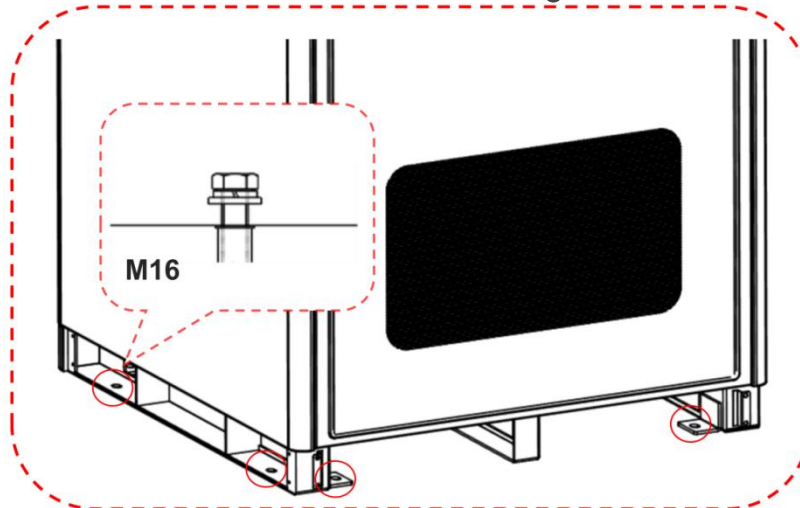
Diagram of tightening bolts at the bottom of the equipment
